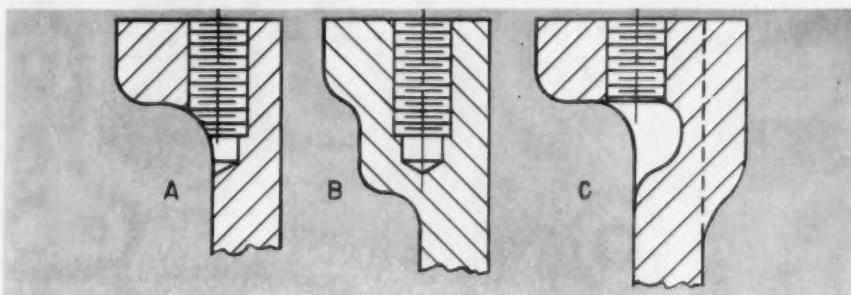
(A)—When the center of a tapped hole is at or near the casting wall, the drill breaks through on a radius and then has to machine half a hole. (B)—A better way of designing
